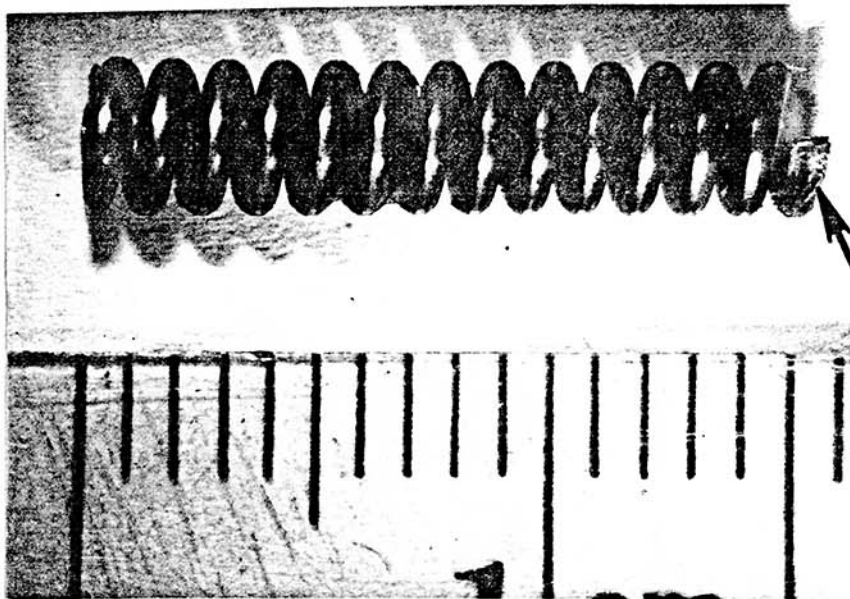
Photograph (enlarged) of failed extractor spring which shows the location of the fracture (arrow).
